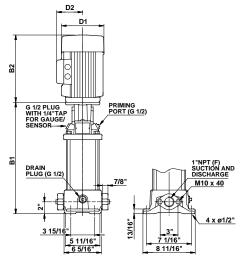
Dimensional sketch of CRF 1-9, 1-17
